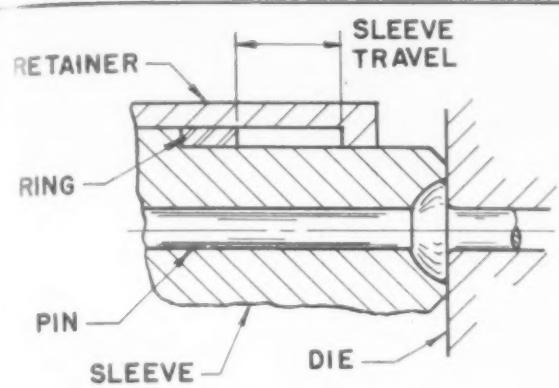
RING METHOD OF REDUCING SLEEVE STROKE
